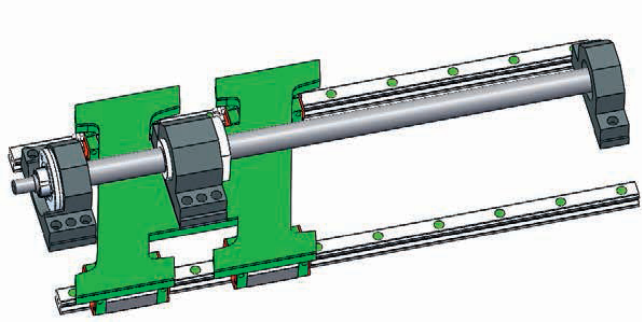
Ballscrew with nut near the left stop limit for fixed bearing alignment
